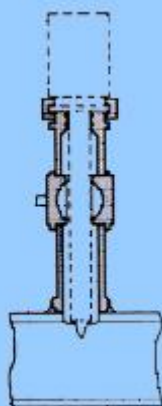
Ball Valve mounted on 1 1/2" nipple
